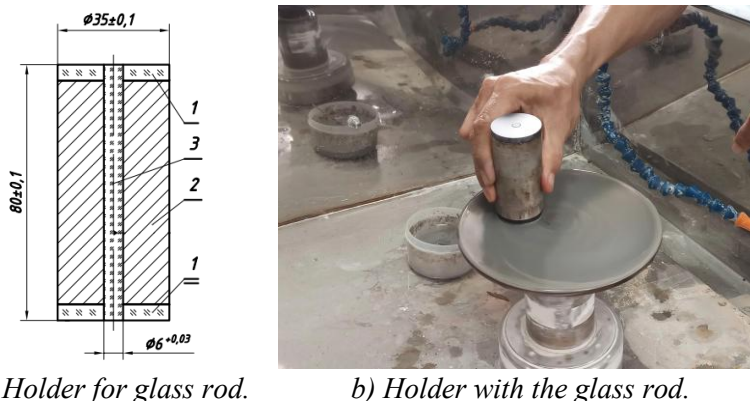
Grinding and polishing of the end faces of the laser glass rod.
